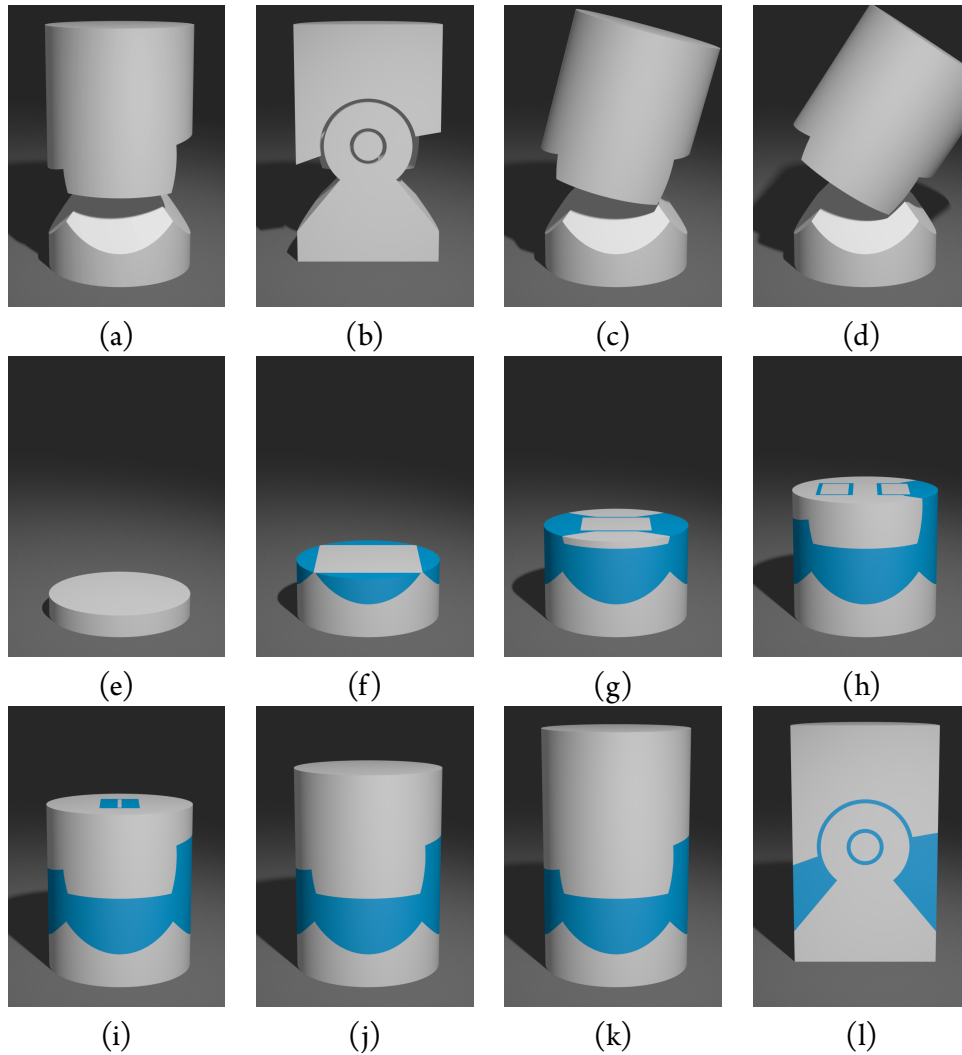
Printing Assemblies With AM, we can manufacture a hinge joint (a), consisting of two movable parts (b-d), without the need for manual assembly. We build the assembled model layer-by-layer (e-k), filling the model volume with build (in gray) and voids with support material (in blue). As long as we keep a minimal tolerance between movable parts, the support material can be removed, resulting in a fully functional mechanical hinge.
